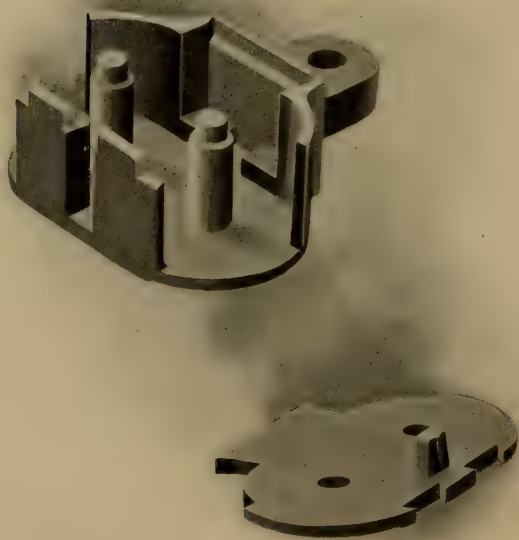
A CASTING WITHOUT MACHINE WORK
